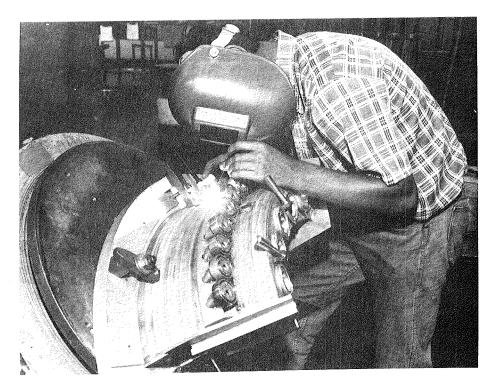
Welding of Carburetor Tube Secondary Air Scoop to Outer Liners
